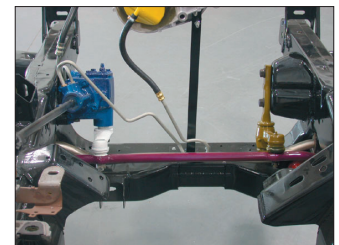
Proper placement of the steering gear box and pitman arm is critical to maintaining a center link parallel to datum.
